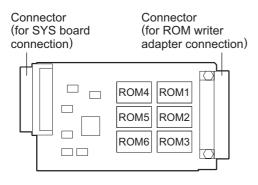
Jig board: PWA-DWNLD-350-JIG2 (48 MB)
